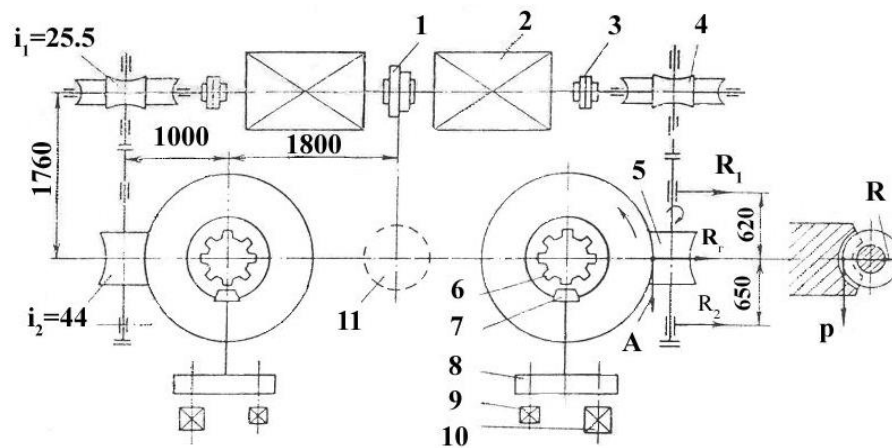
Pressing mechanism of continuous cold strip mill - 1680 [5-7].
